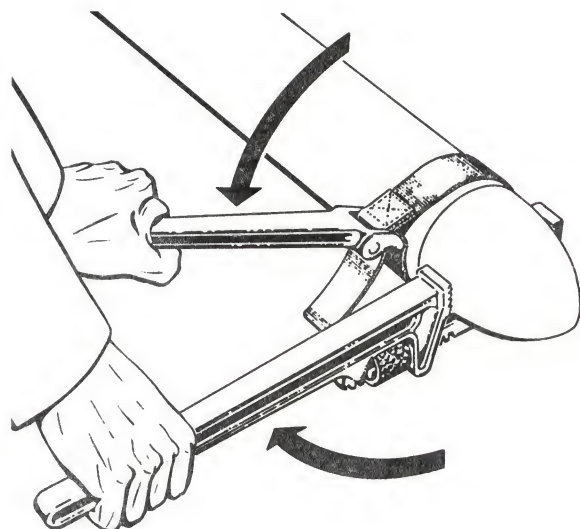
Assembling Head and Motor of 2.25-Inch SCAR Rocket.
